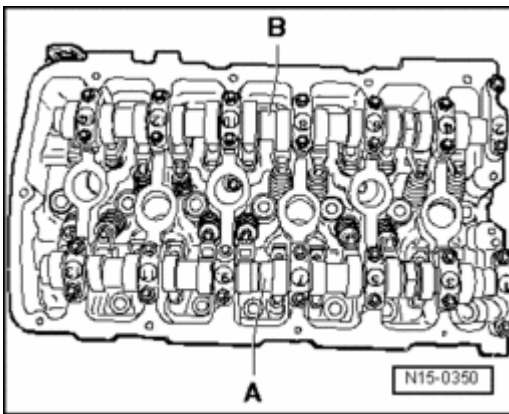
Identifying Intake Camshaft And Exhaust Camshaft
